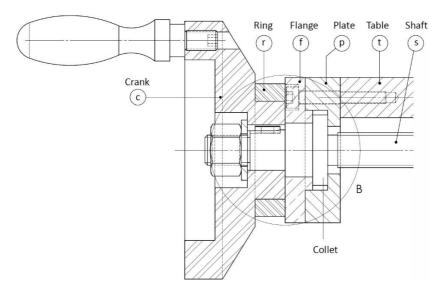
Drawing in nominal geometry of the operating mechanism of the table of a grinding machine
